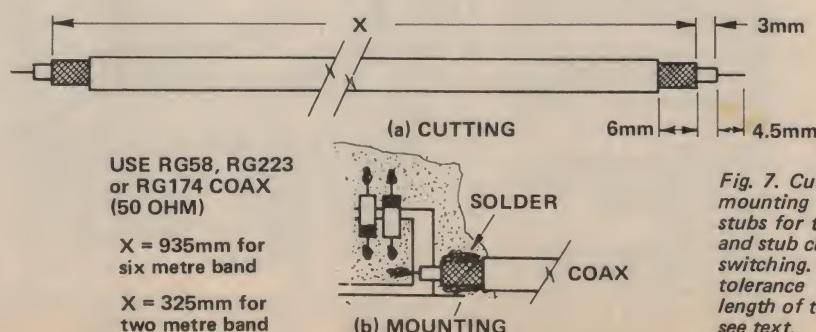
Cutting and mounting the coax stubs for the diode and stub changeover switching. There is a tolerance on the length of the stubs—see text.
